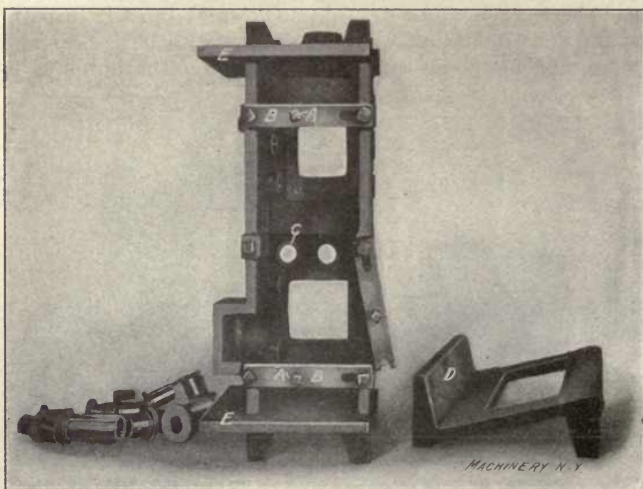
Jig for Drilling Holes at other than 90-degree Angles
